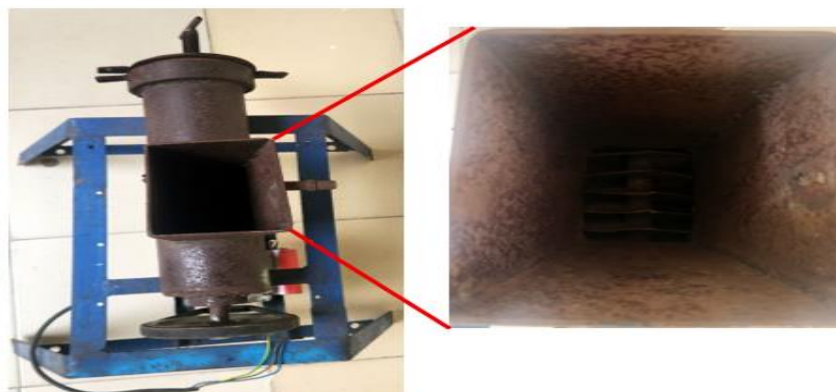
Design views showing the feed hopper, shaft and beater-conveyor assembly
